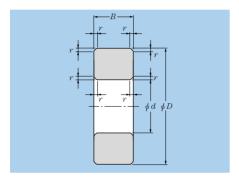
Radial bearings (excluding tapered roller bearings)
